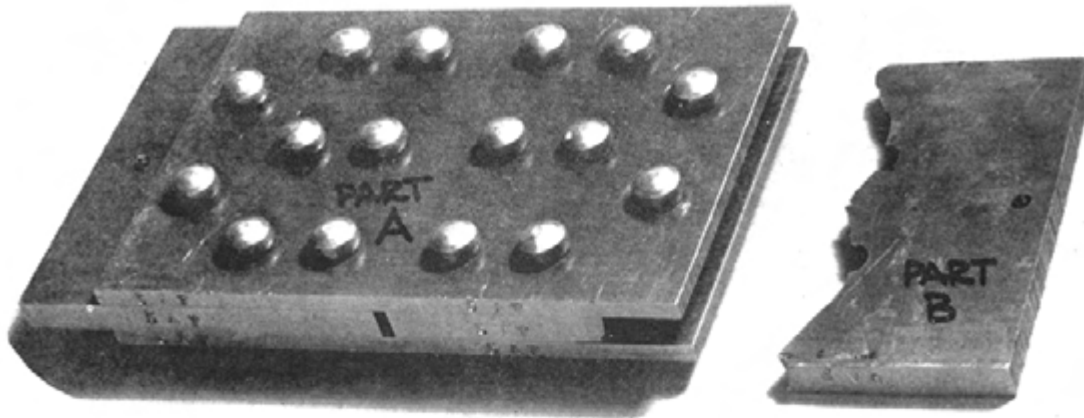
A-35 Fatigue failure of riveted double lap joint
